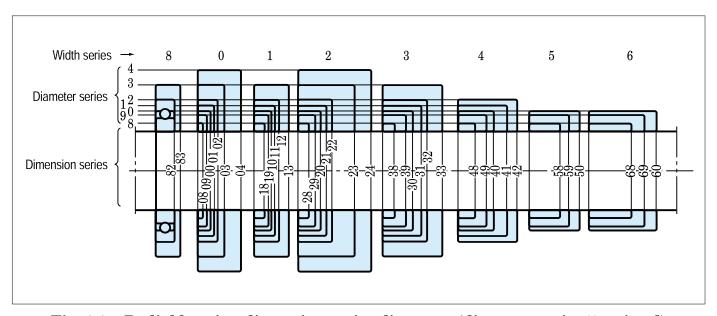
Radial bearing dimension series diagram (diameter series 7 omitted)
